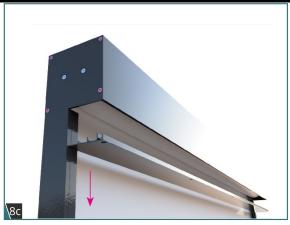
Application of mounting in the case of: Zipner 110 slim. Unscrew and remove the inspection part of the cassette
